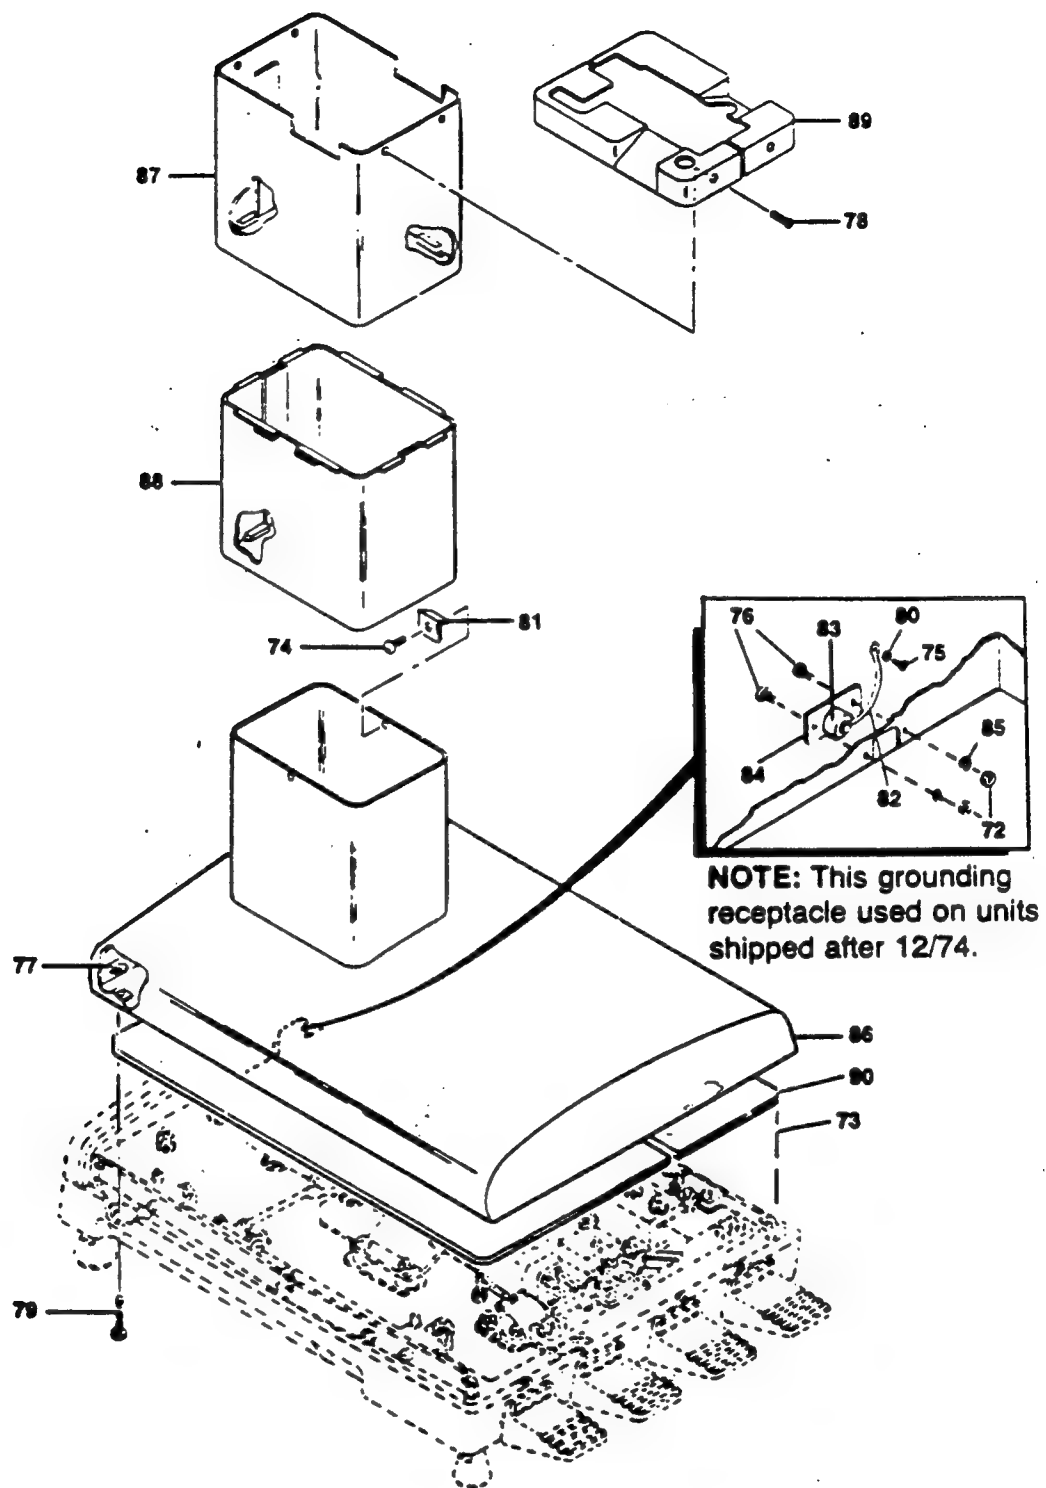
2080L AND 2080 COMPAT BASE ASSEMBLY (Sheet 2 of 2)
